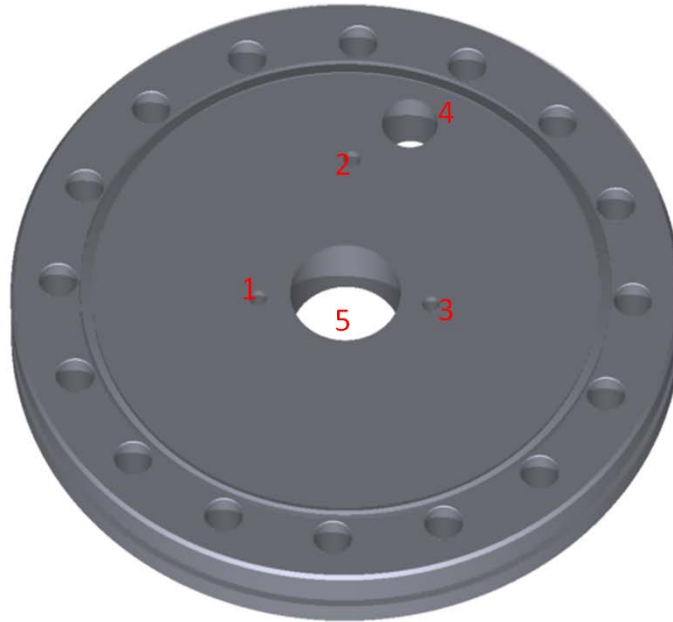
The custom bottom flange for the vacuum chamber with the positions of the cavity bolt holes (1,2,3), electrical feedthrough (4) and MOT beam hole (5) indicated.
